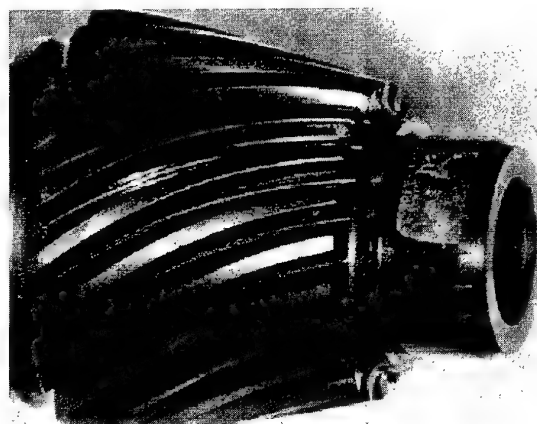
Main Module Input Pinion with Spalled Integral Raceway Bearing SB 2205.
